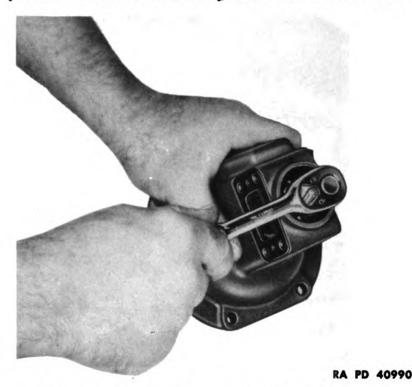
Removing Lock Screw from Weight Carrier Shaft
